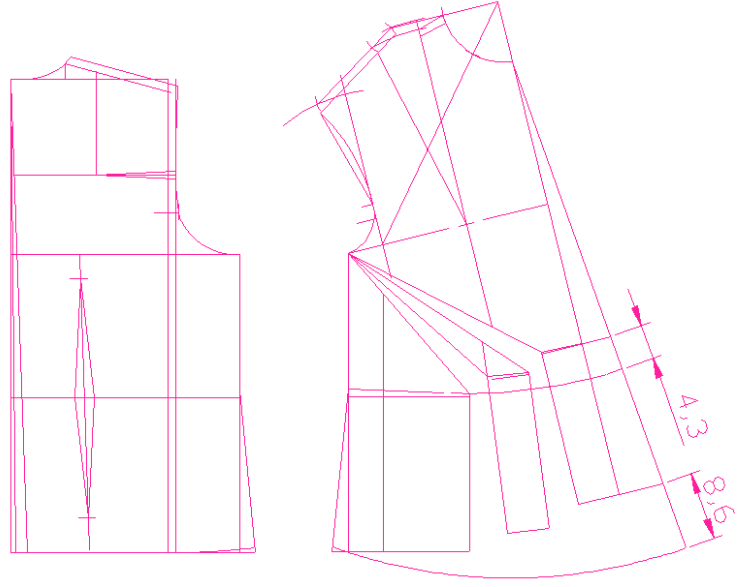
Final styling modification of blouse pattern construction for pregnant women
